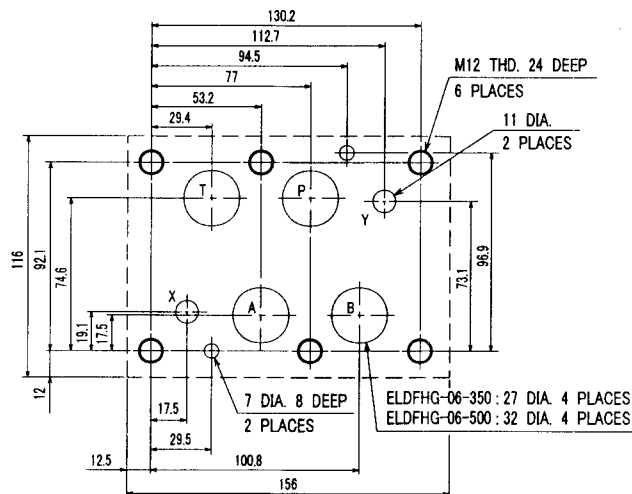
Dimensions of Valve Mounting Surface for ELDFHG-06-350/500-※-※-※-10
